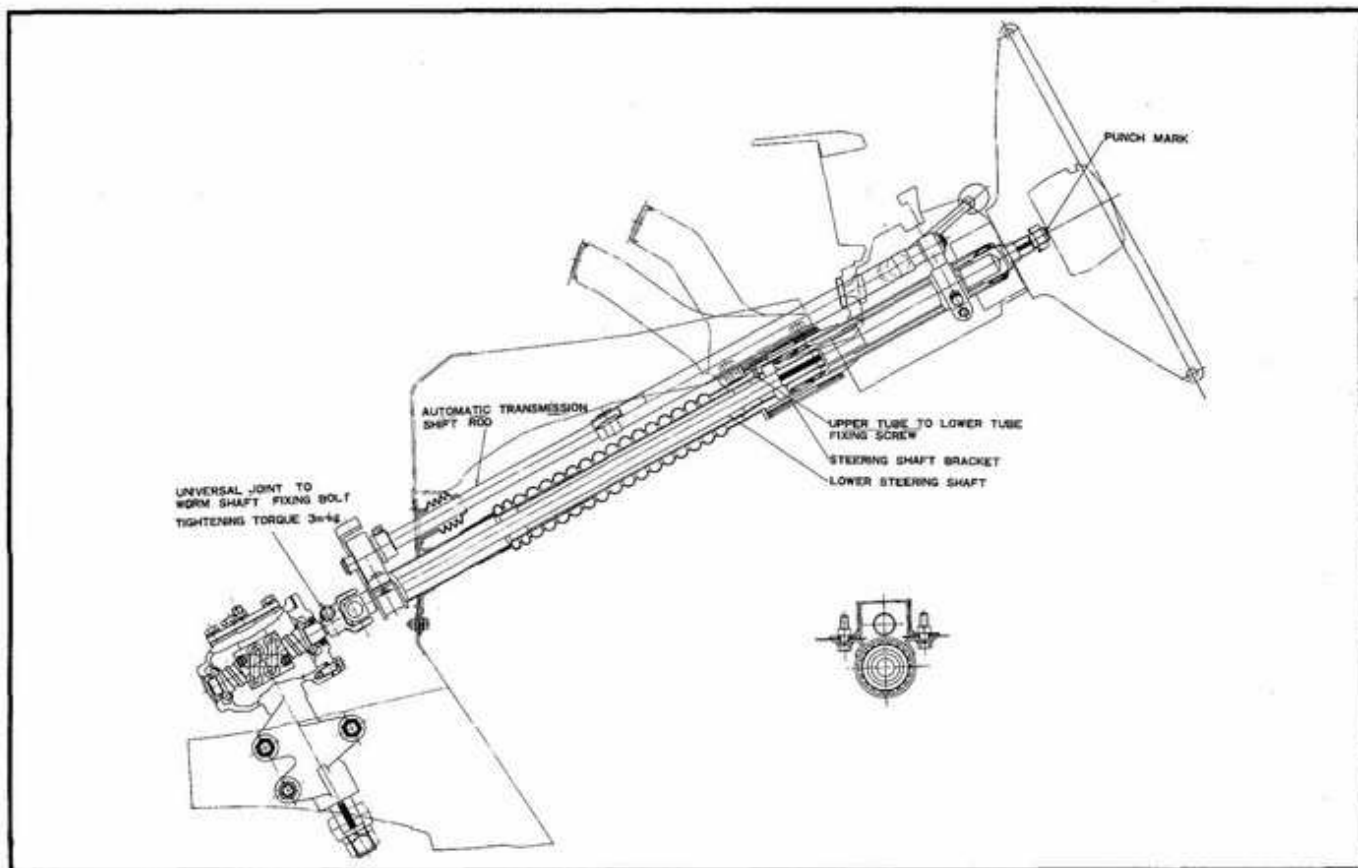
Construction of the collapsible steering mounted on the 510 series
